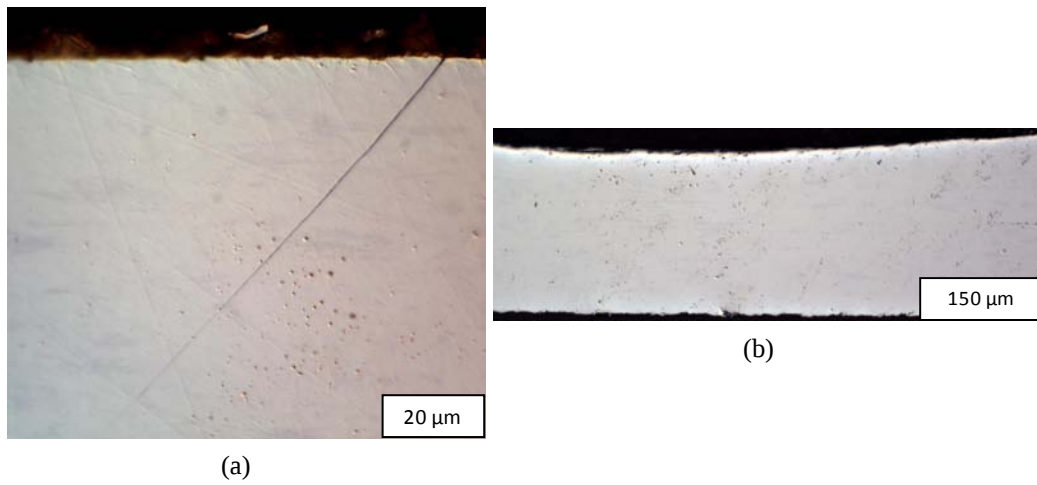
(a) Cracking and (b) thinning of a gasket due to fretting.
